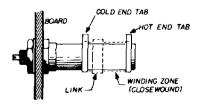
Inductor assembly. Complete coil winding data is given in (able 1.
